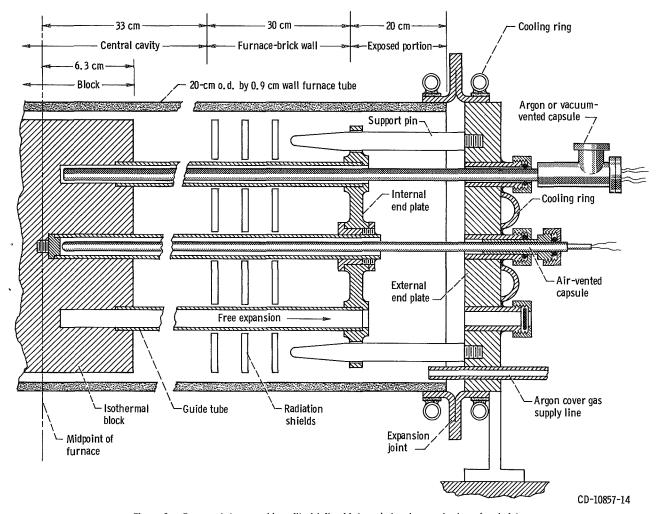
Furnace tube assembly, with details of internal structure and external end plate.
